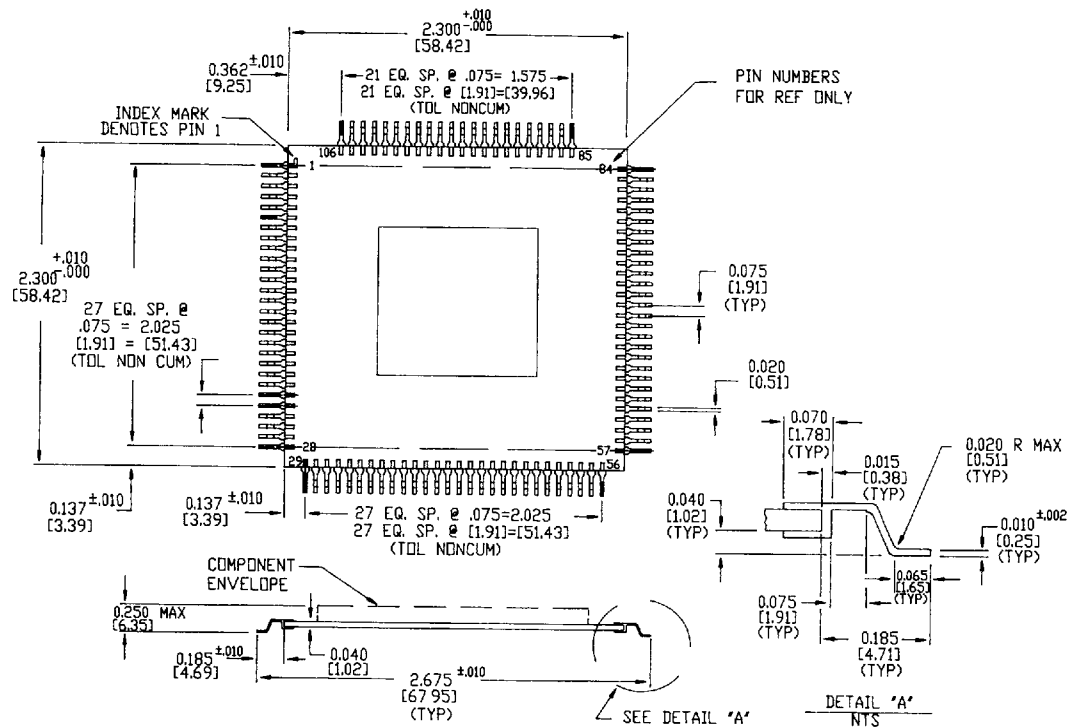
DD-03232 SURFACE MOUNT PACKAGE MECHANICAL OUTLINE
